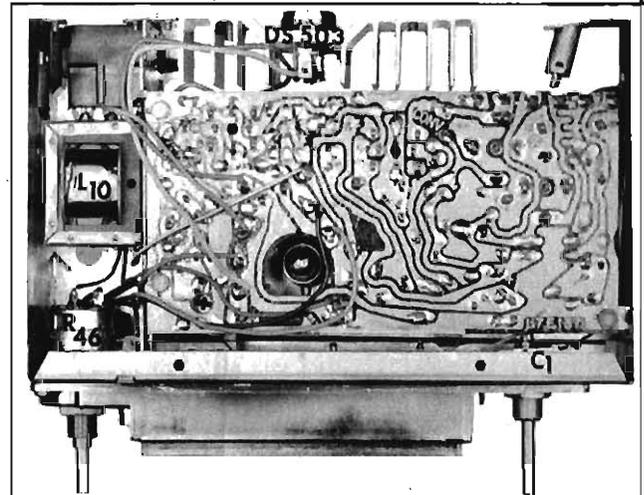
CHEVELLE PARTS LAYOUT CIRCUIT BOARD VIEW - 985773 - RADIO
